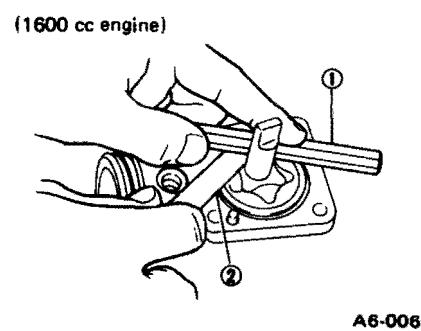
Measuring rotor-to-case and gear-to-case clearance
